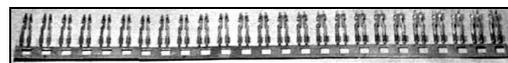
Stamped card, having 25 pairs of blades with Lachaussee type baffles.
